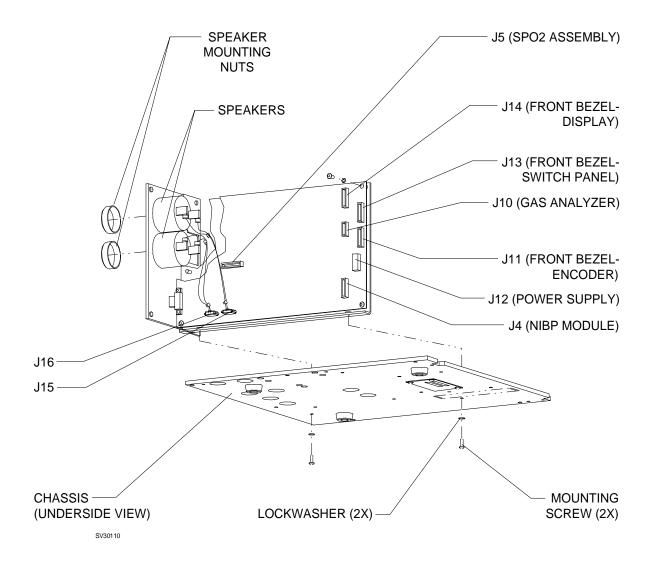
REPLACEMENT OF PROCESSOR ASSEMBLY
